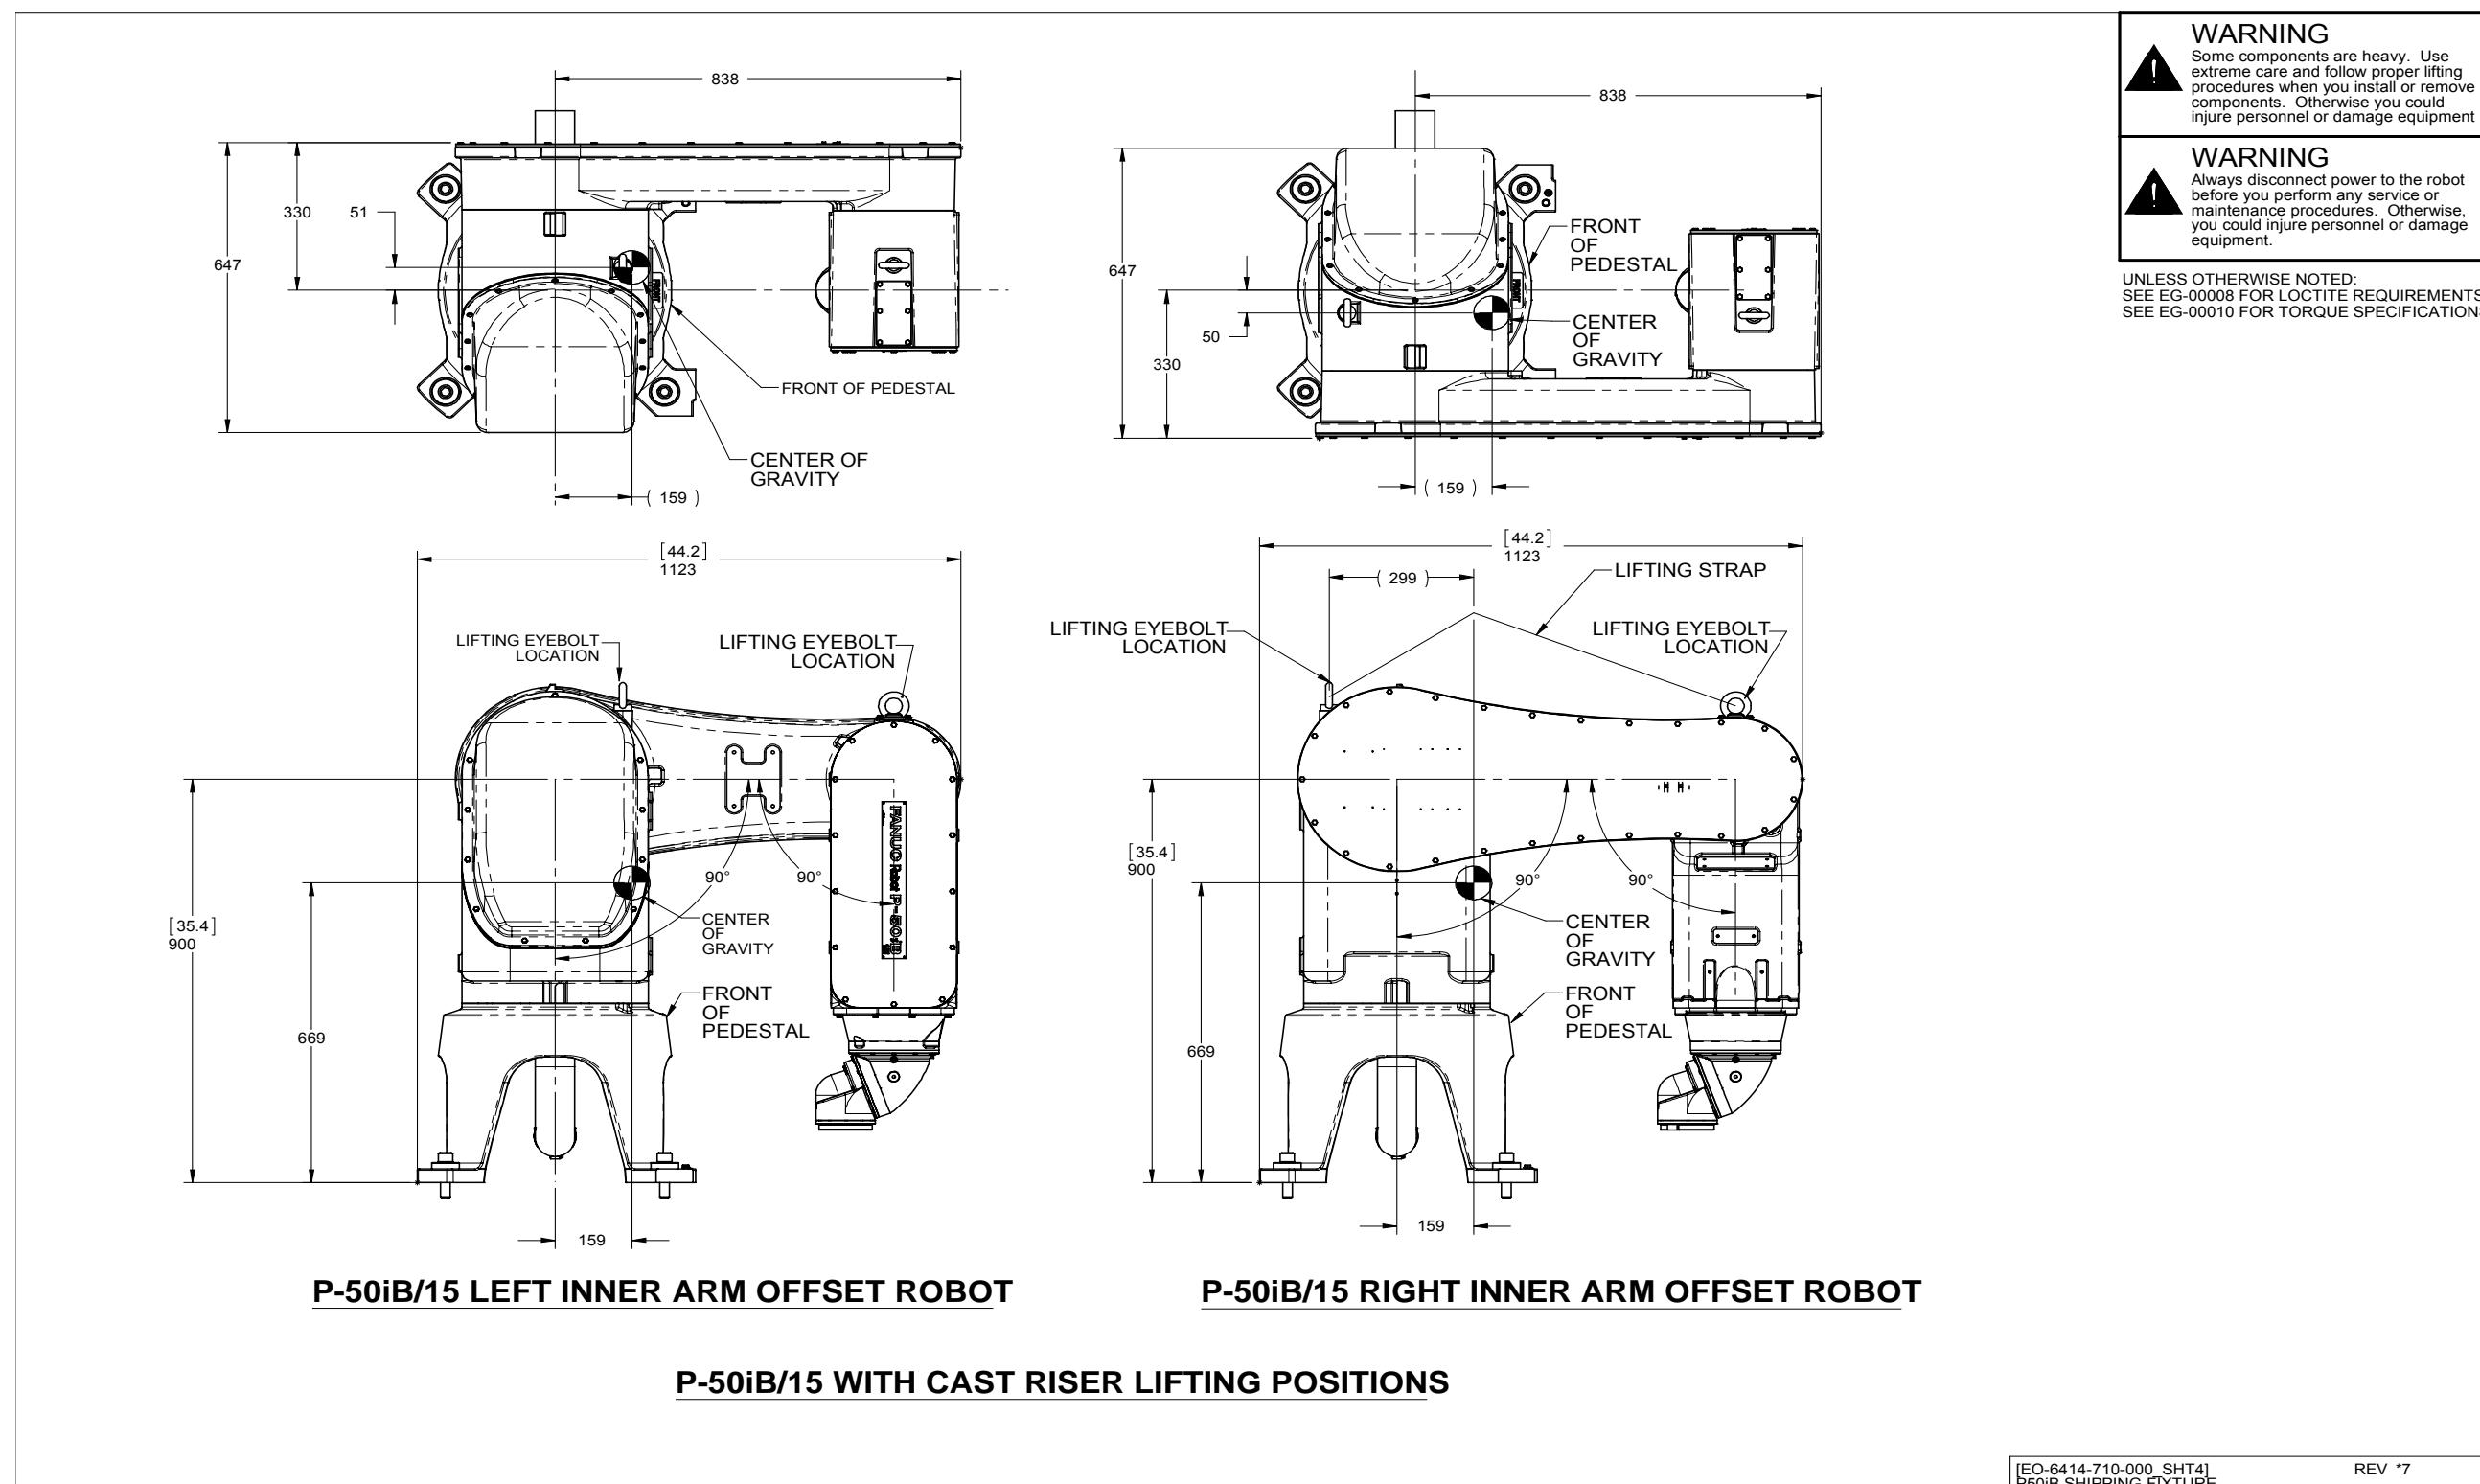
EO-6414-710-000 SHT4, P50iB SHIPPING FIXTURE
